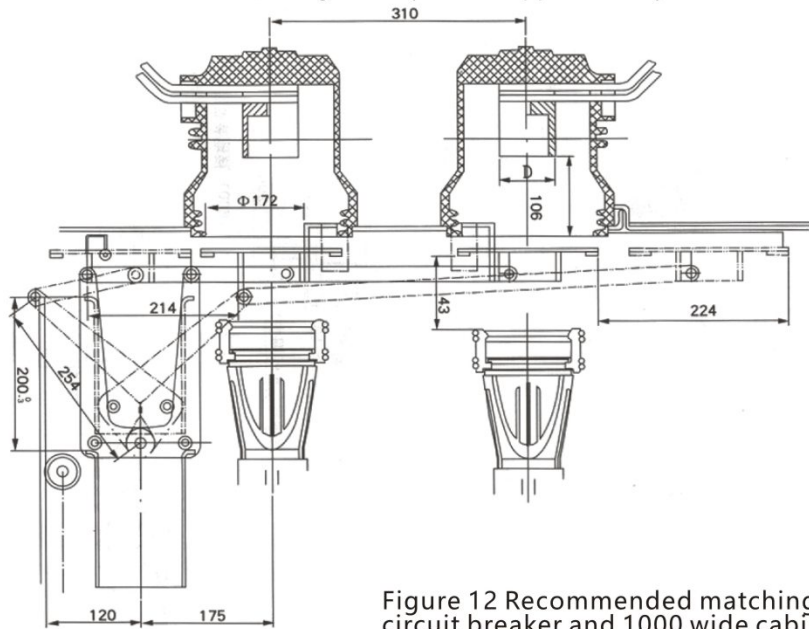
Recommended matching dimensions for circuit breaker and 1000 wide cabinet body
